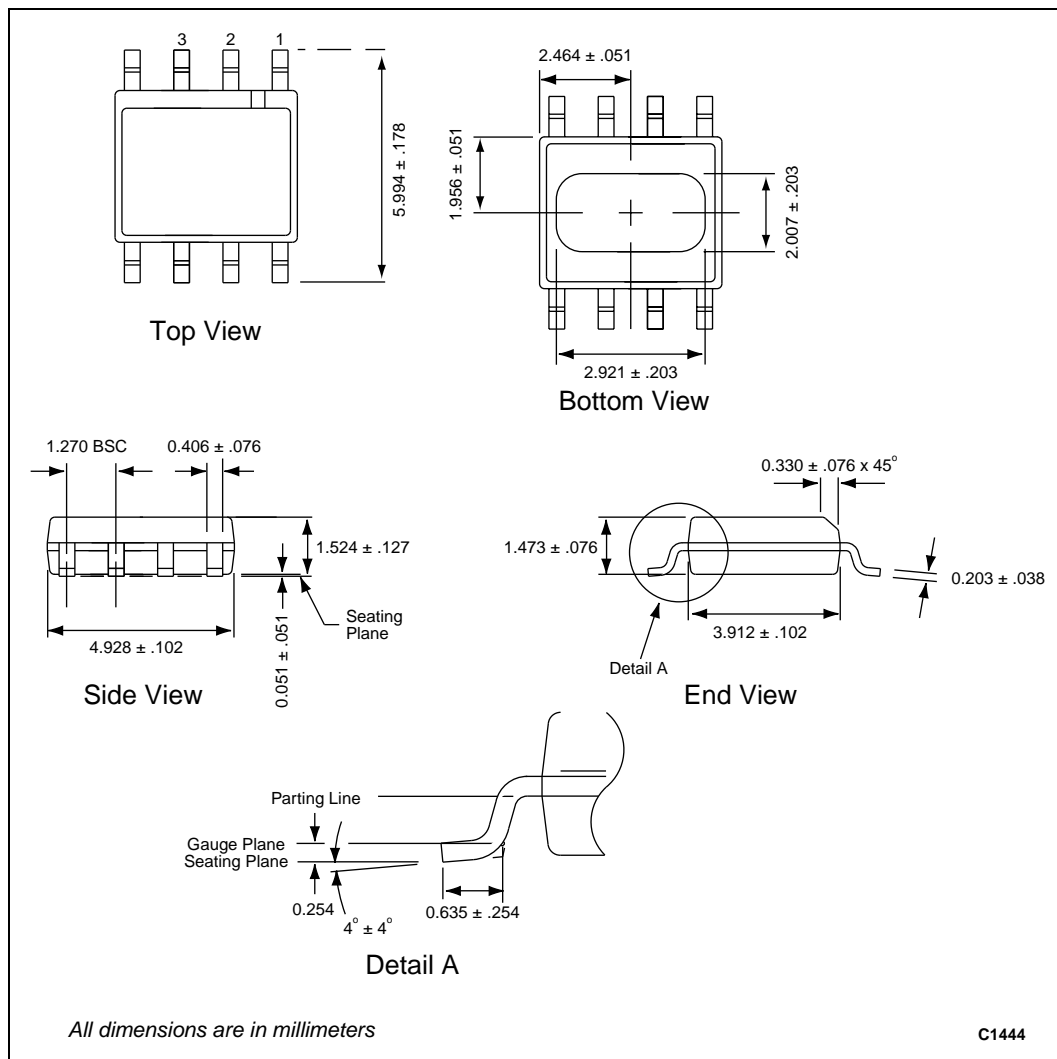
CX65002 8-Pin SOIC Package Dimension Drawing
